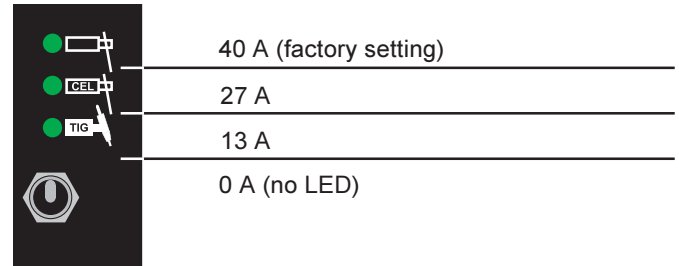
Rod-electrode welding: Arc-force parameter setting
